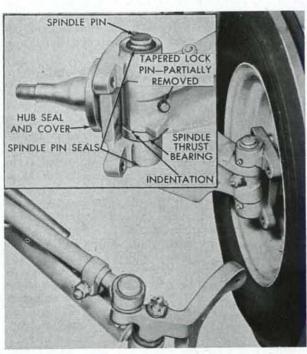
Spindle on Heavy Duty Industrial attaches to axle by means of spindle pin and tapered lock pin as shown. Install spindle thrust bearing with indentation up.
